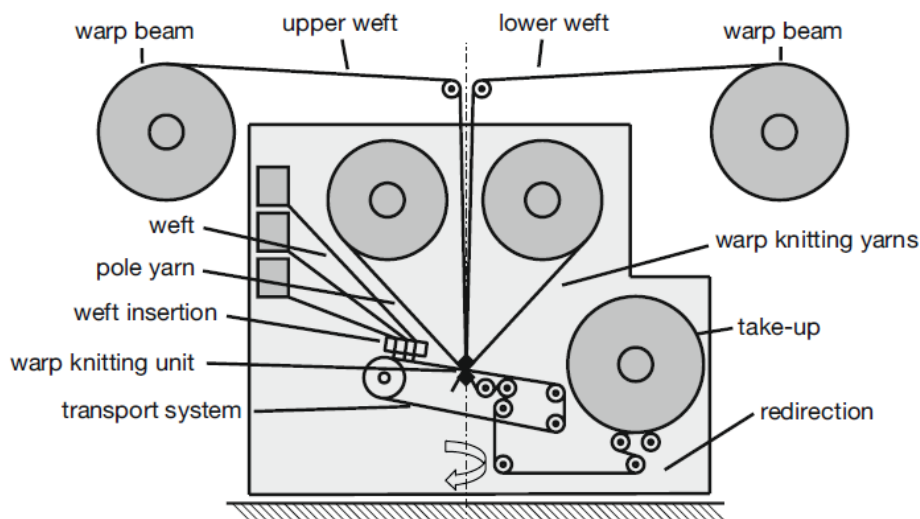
Coursewise multiaxial warp-knitting machine [GVW15]
